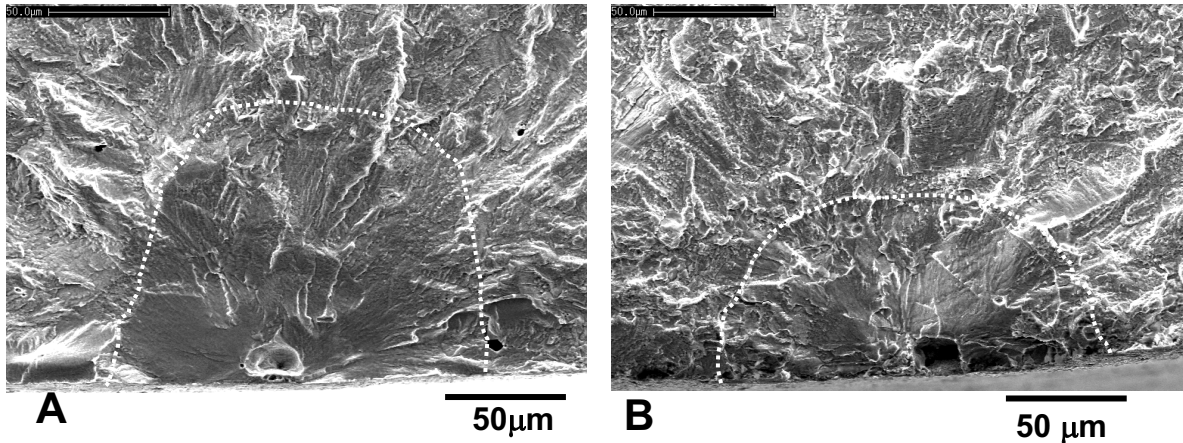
SEM images showed the fracture surfaces around crack initiation sites are faceted, (A) Sample 01-491 and (B) Sample 01-486.
